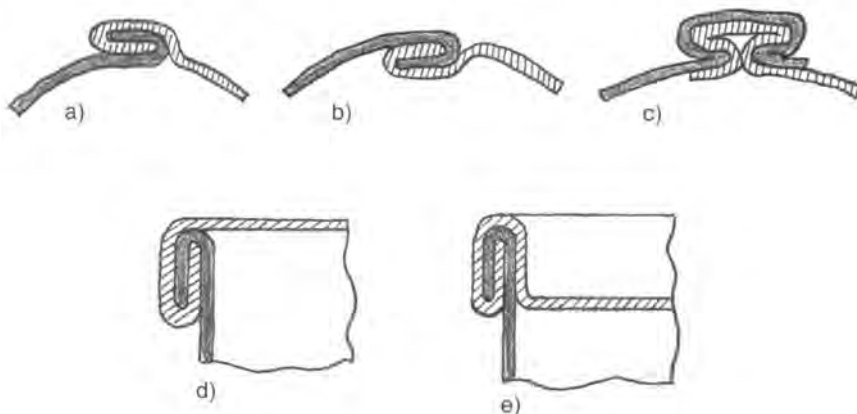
F4f-1 Sheet metal seam joints. a) outside seam, b) inside seam, c) compound seam, d) double seam for containers, e) double seam for containers with recessed end.
